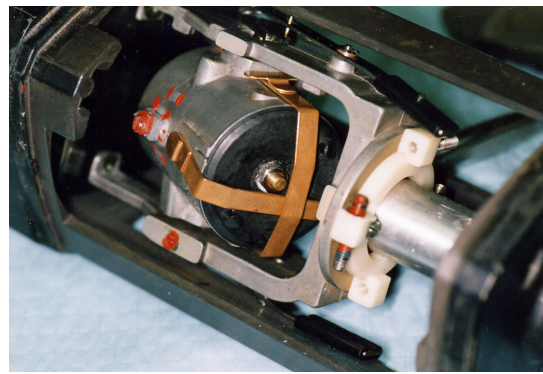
Gyro housing, showing forward movement of the inner bearing.
